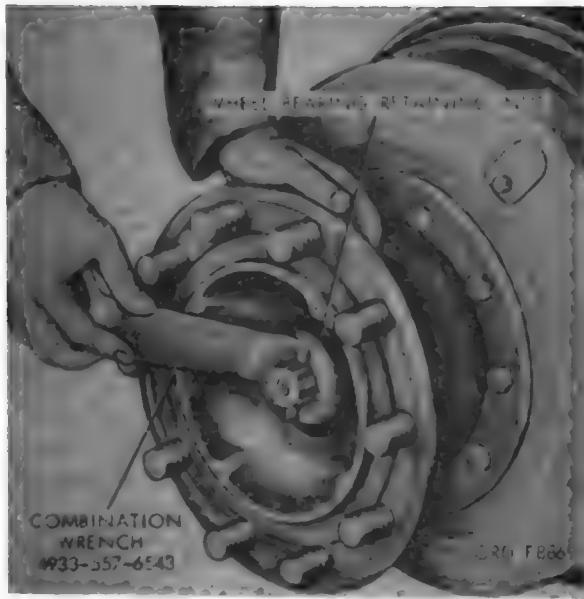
Removing or installing the wheel bearing retaining nut (M114 and M114A1).
